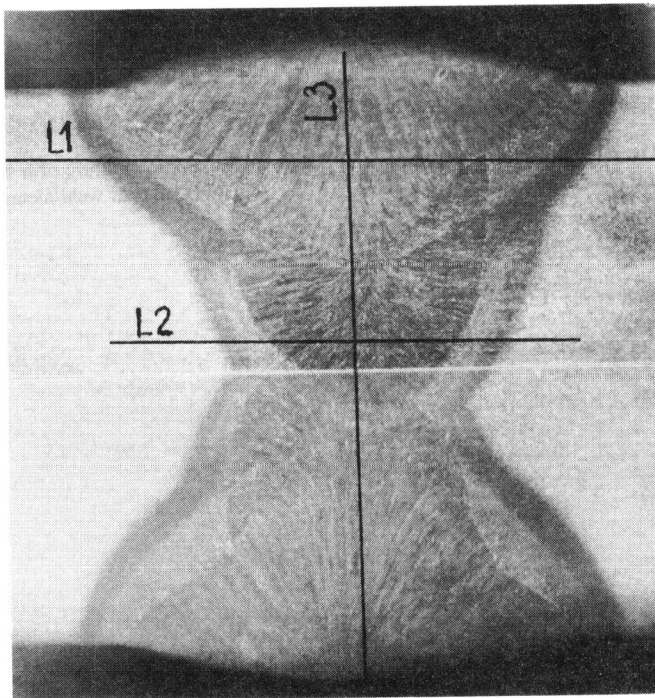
The macrostructure of weld joint and measurement lines of microhardness, x5
